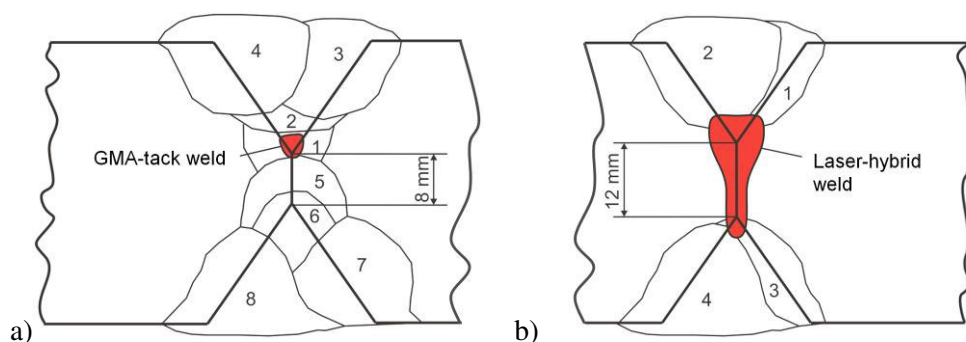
Comparison between two welding technologies: longitudinal weld consisting of a GMA-tack weld and SAW filler layers (a); longitudinal weld consisting of a laser-hybrid weld and SAW filler layers (b)
